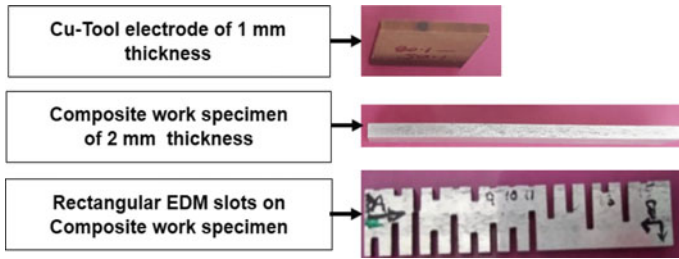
The photographs of tool and AA6061-B4C composite work specimens
